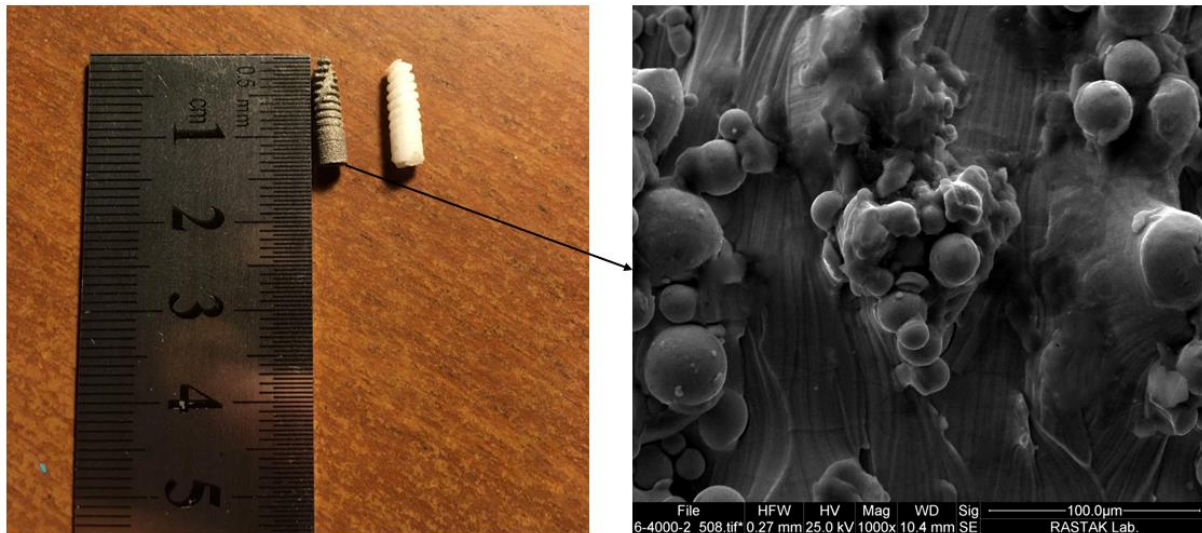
An implant sample made with SLM and its surface image, sample fabrication carried out by researchers.
